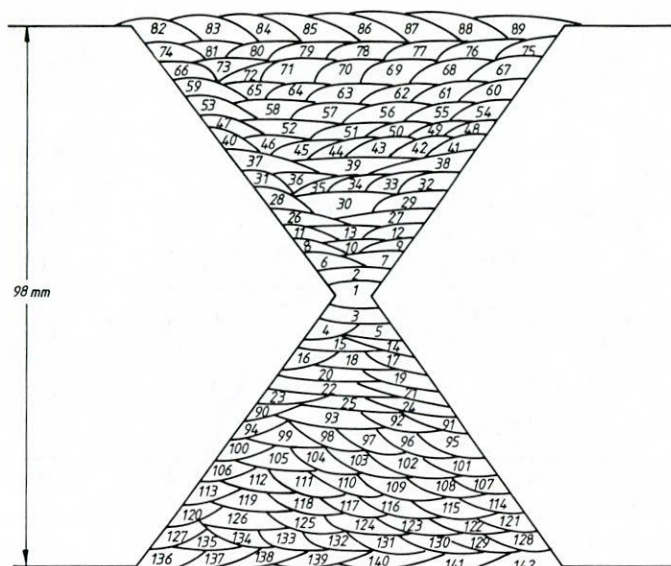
Process record sheet for welding of specimen J204 (welding sequence).
